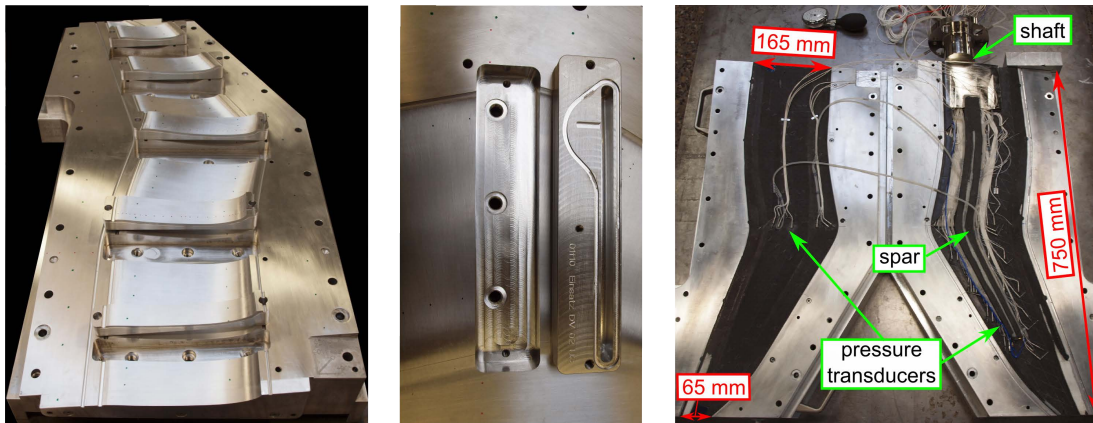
Aluminium mold with removable inserts; instrumented half shells
